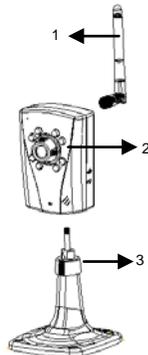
ACCESSORY ASSEMBLY EXPLODED VIEW
